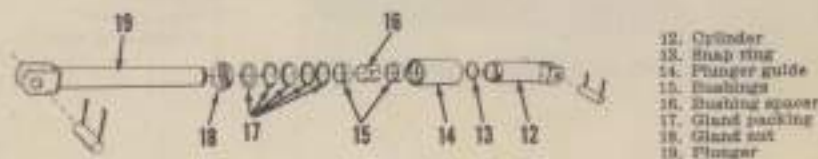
Exploded view of 1 3/4 and 2 inch remote (cylinder) ram.
